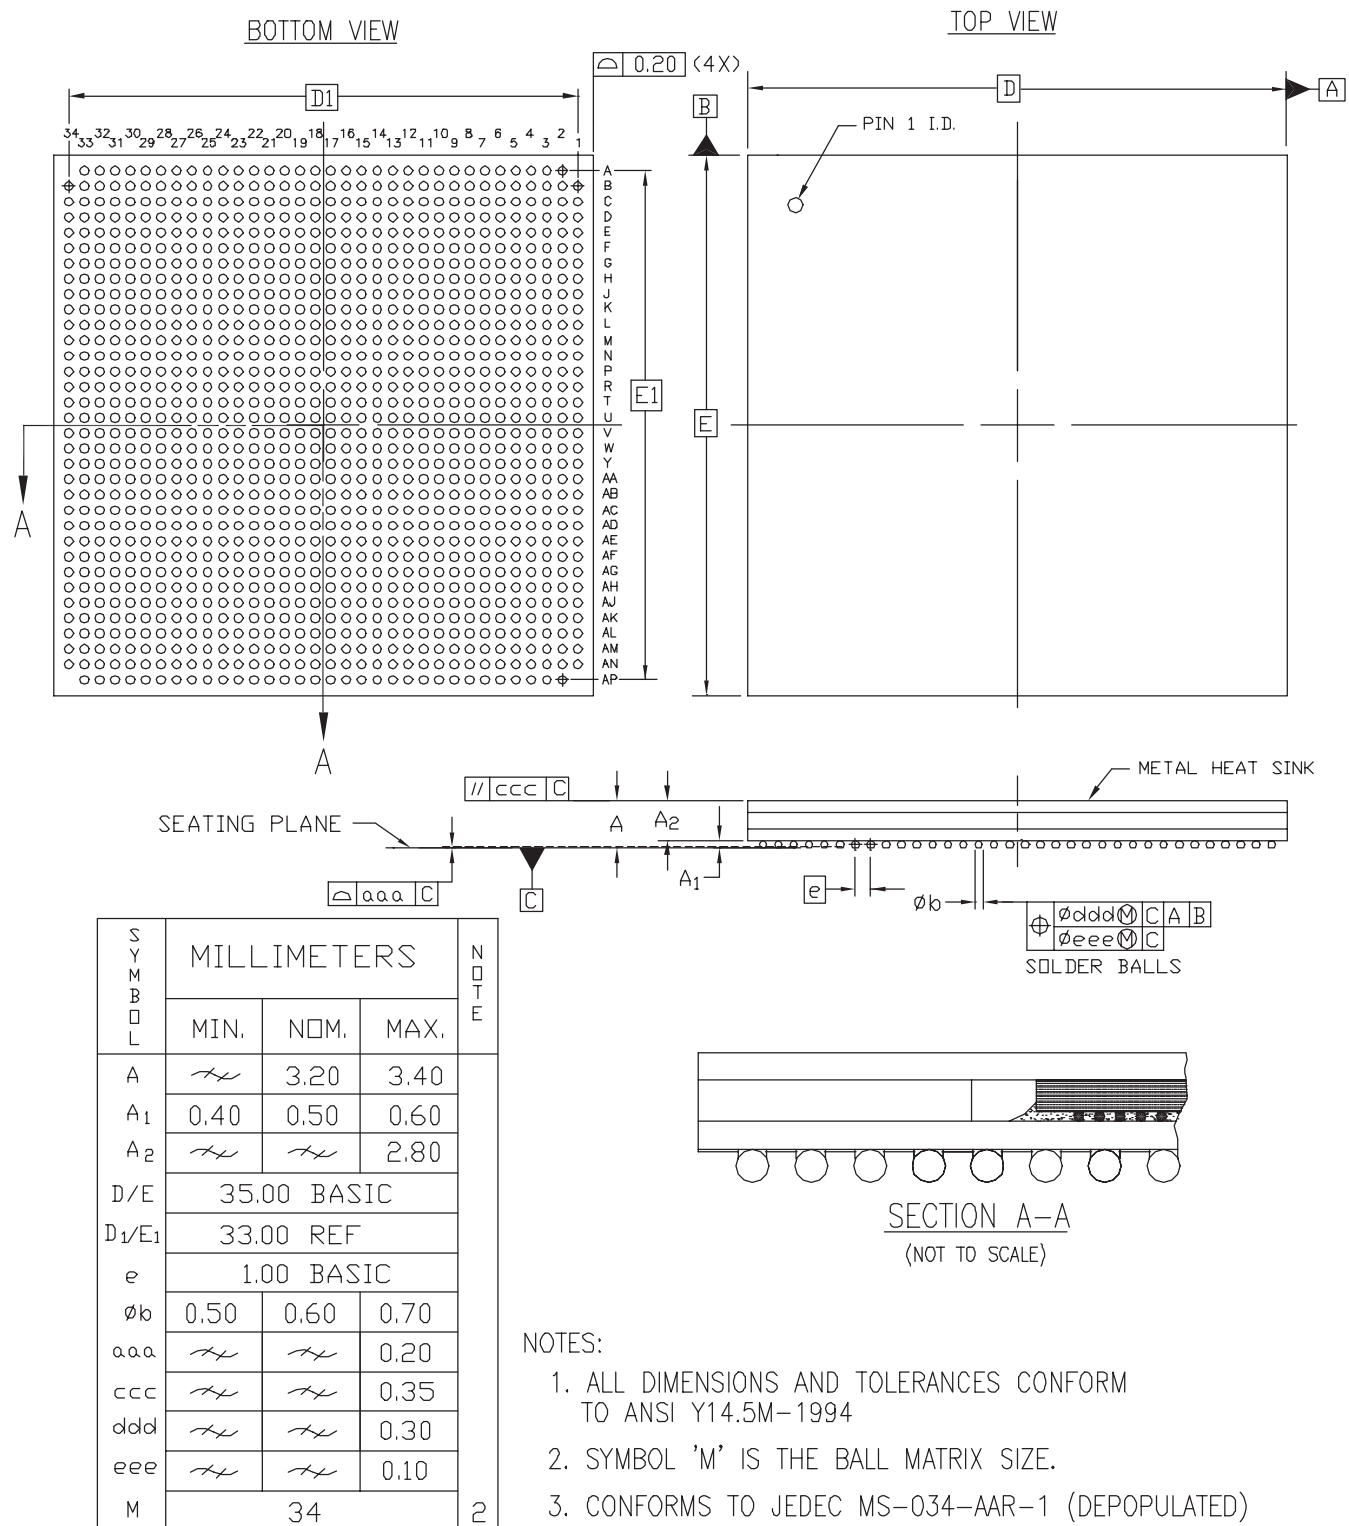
FF1152 Flip-Chip Fine-Pitch BGA Package
